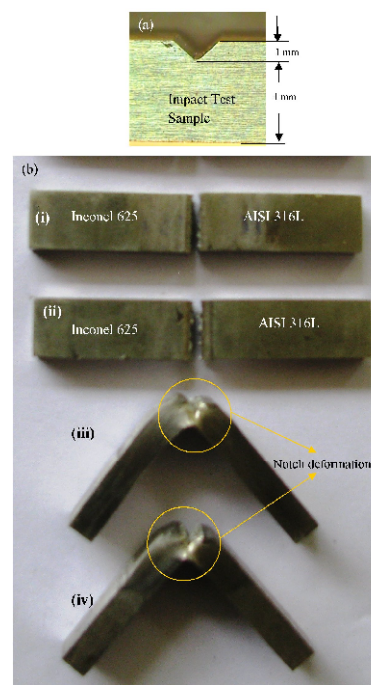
(a) Impact test sample; (b) fractured samples of CCGTA weldments and PCGTA weldments employing: (i) and (ii) ER2209 filler; (iii) and (iv) ERNiCr-3 filler, respectively.
